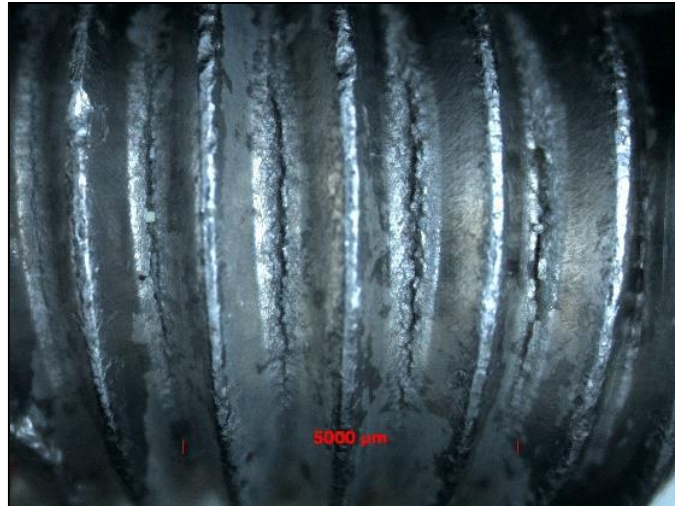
Bending damages on the threaded section, secondary fracture initiations of the failed upper-eye rod end observed under the Stereomicroscope. (Source: University of Pretoria Failure Analysis Report)
